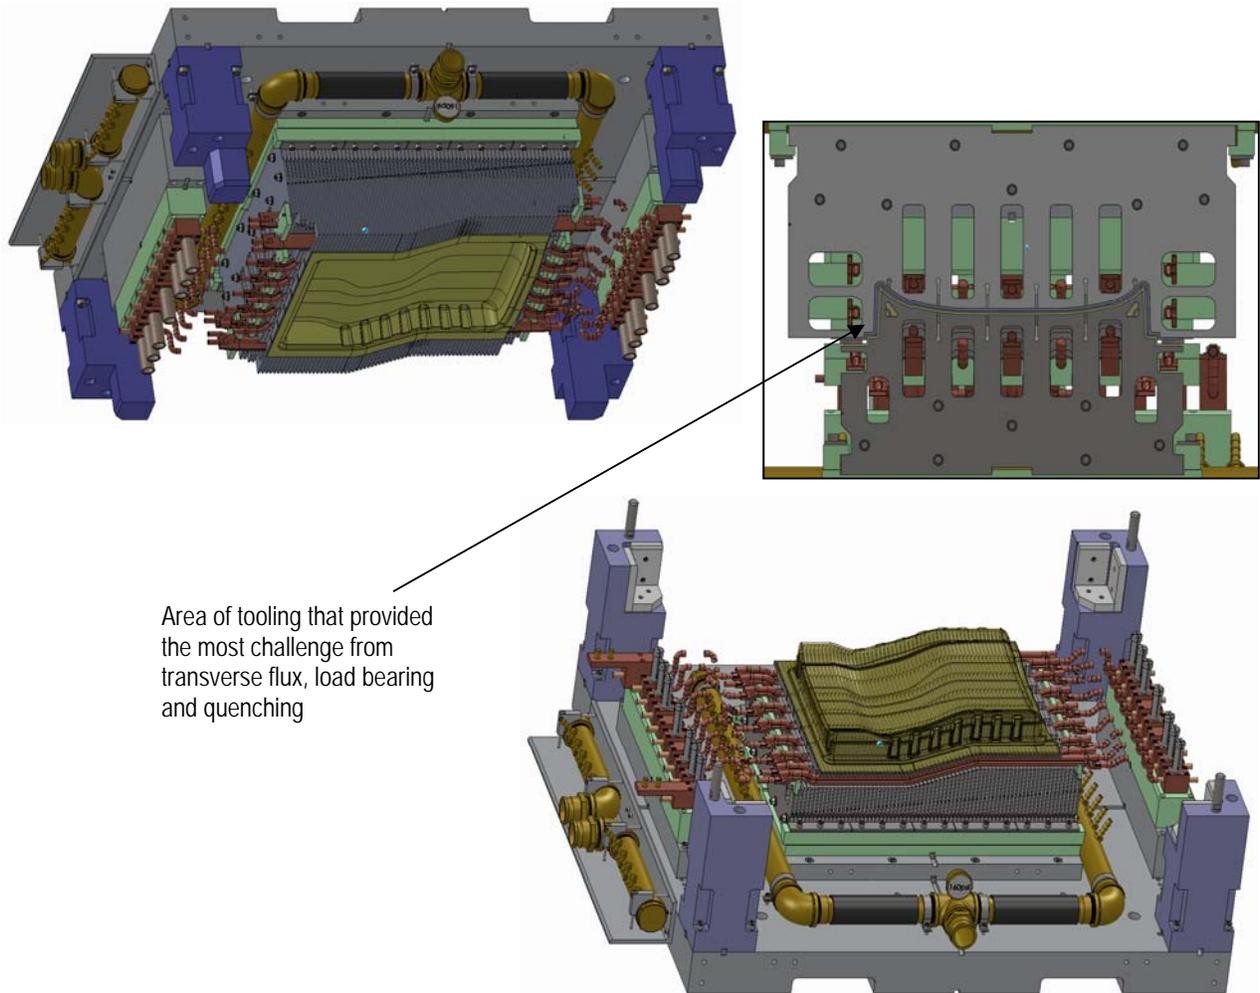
Induction molding tool design for the Ford seat pan is shown with the top and the bottom halves along with cross section of the tool running parallel to the stainless steel laminations
